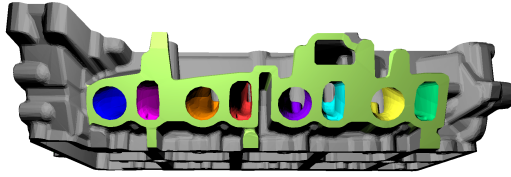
Intake manifold of a cylinder head segmented for surface inference.
